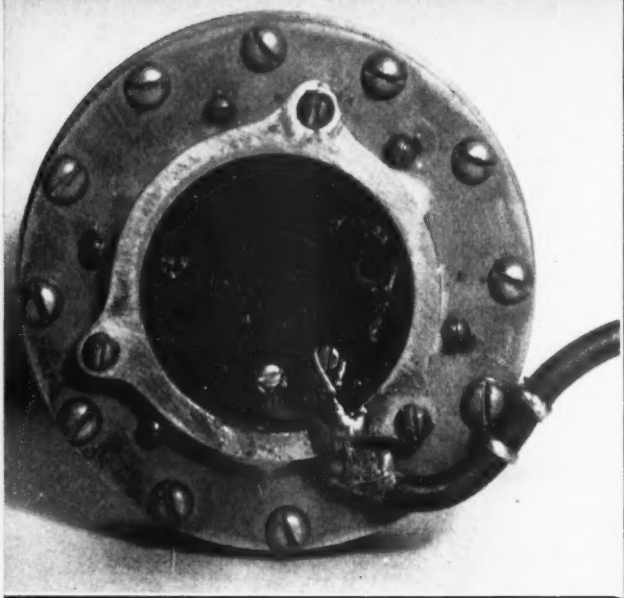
Showing how the retaining ring holds the phone in place making a rigid assembly. A piece of sheet aluminum to serve as a shield over the rear of the mike could be held in place by the three bolts that hold the retainer ring.
